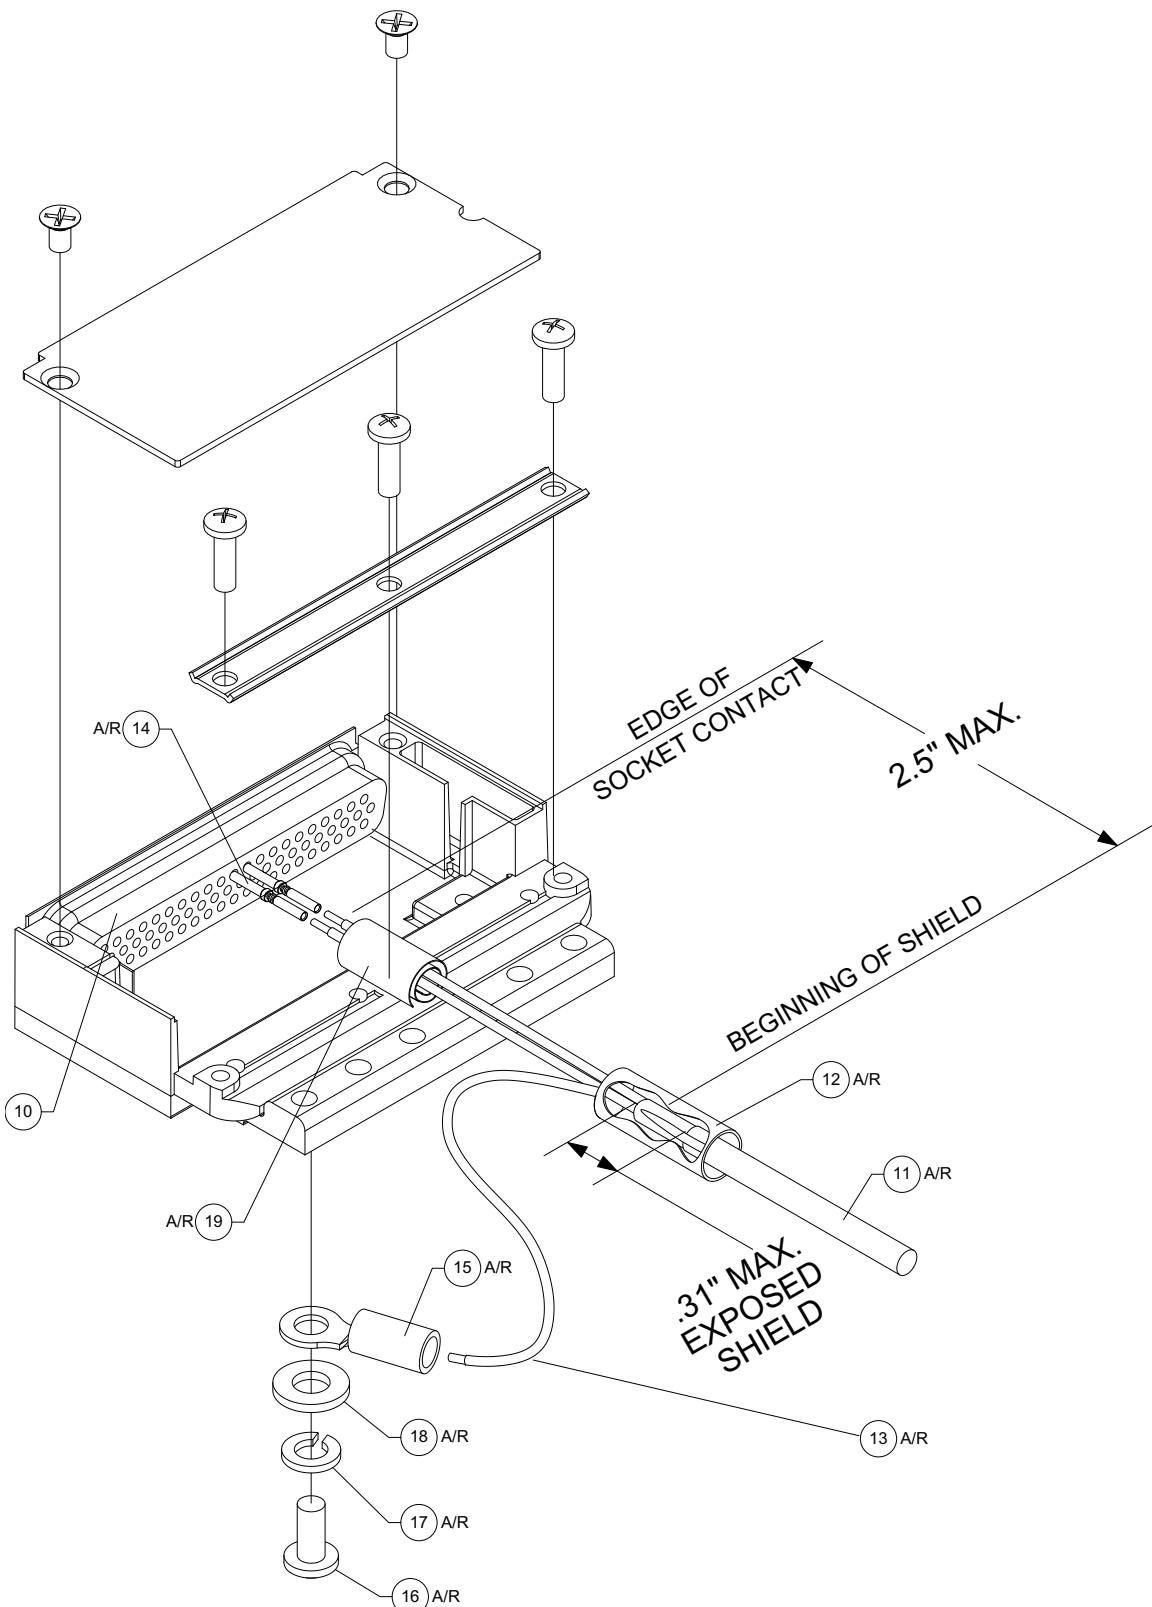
Shield Termination on Backshell Assembly (Preferred Method)
